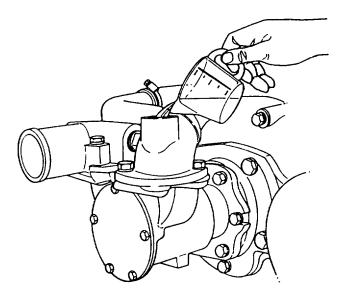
Priming Diesel Engine Raw Water Pump.
